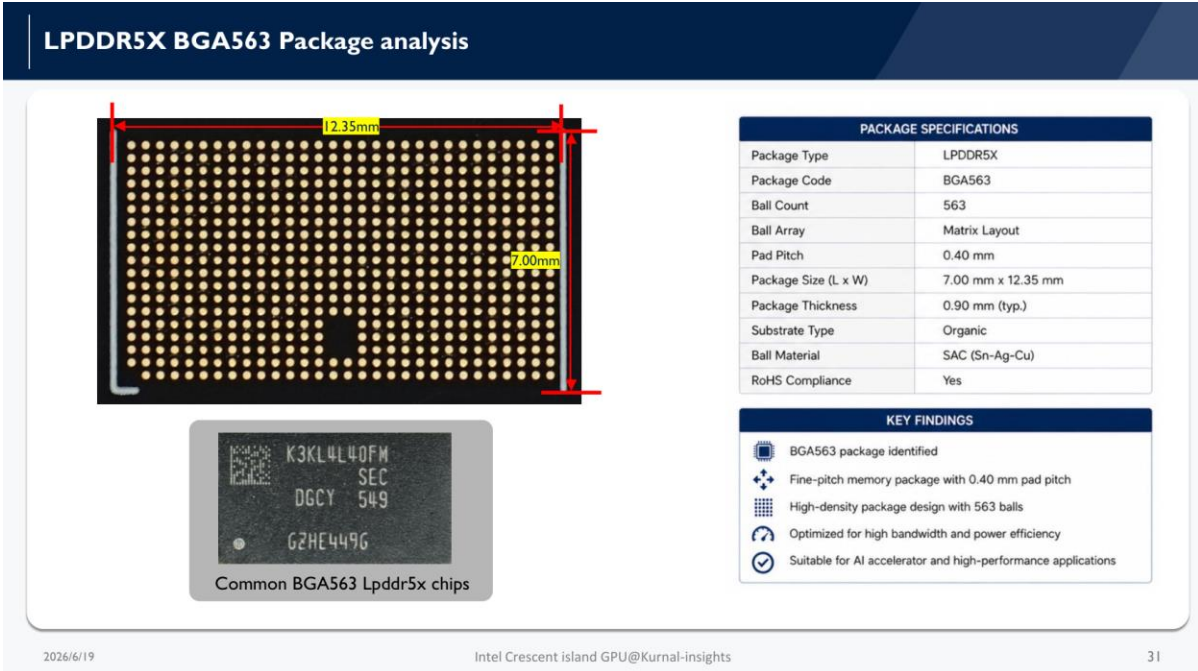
LPDDR5X BGA563 package – 12.35 mm × 7.00 mm.
